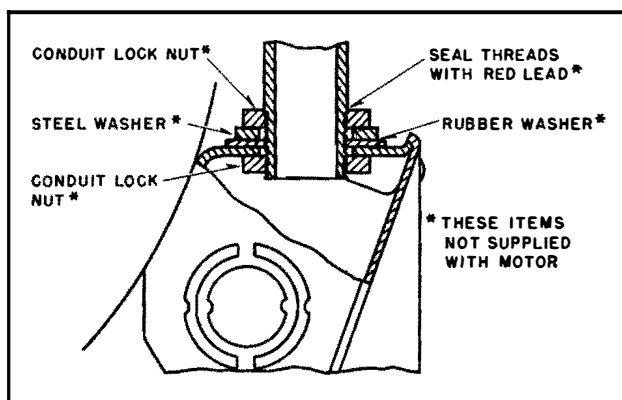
Method of Connecting Conduit to Keep Out Liquids When Leads Enter Top of Conduit Box
